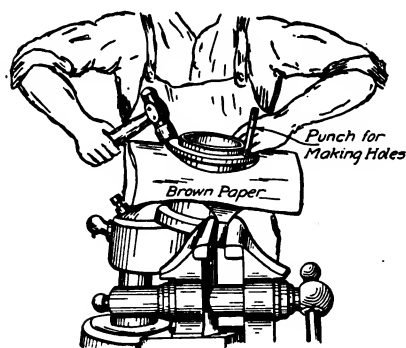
Cutting Gaskets on the Parts with a Hammer Is the Best and Quickest Method
